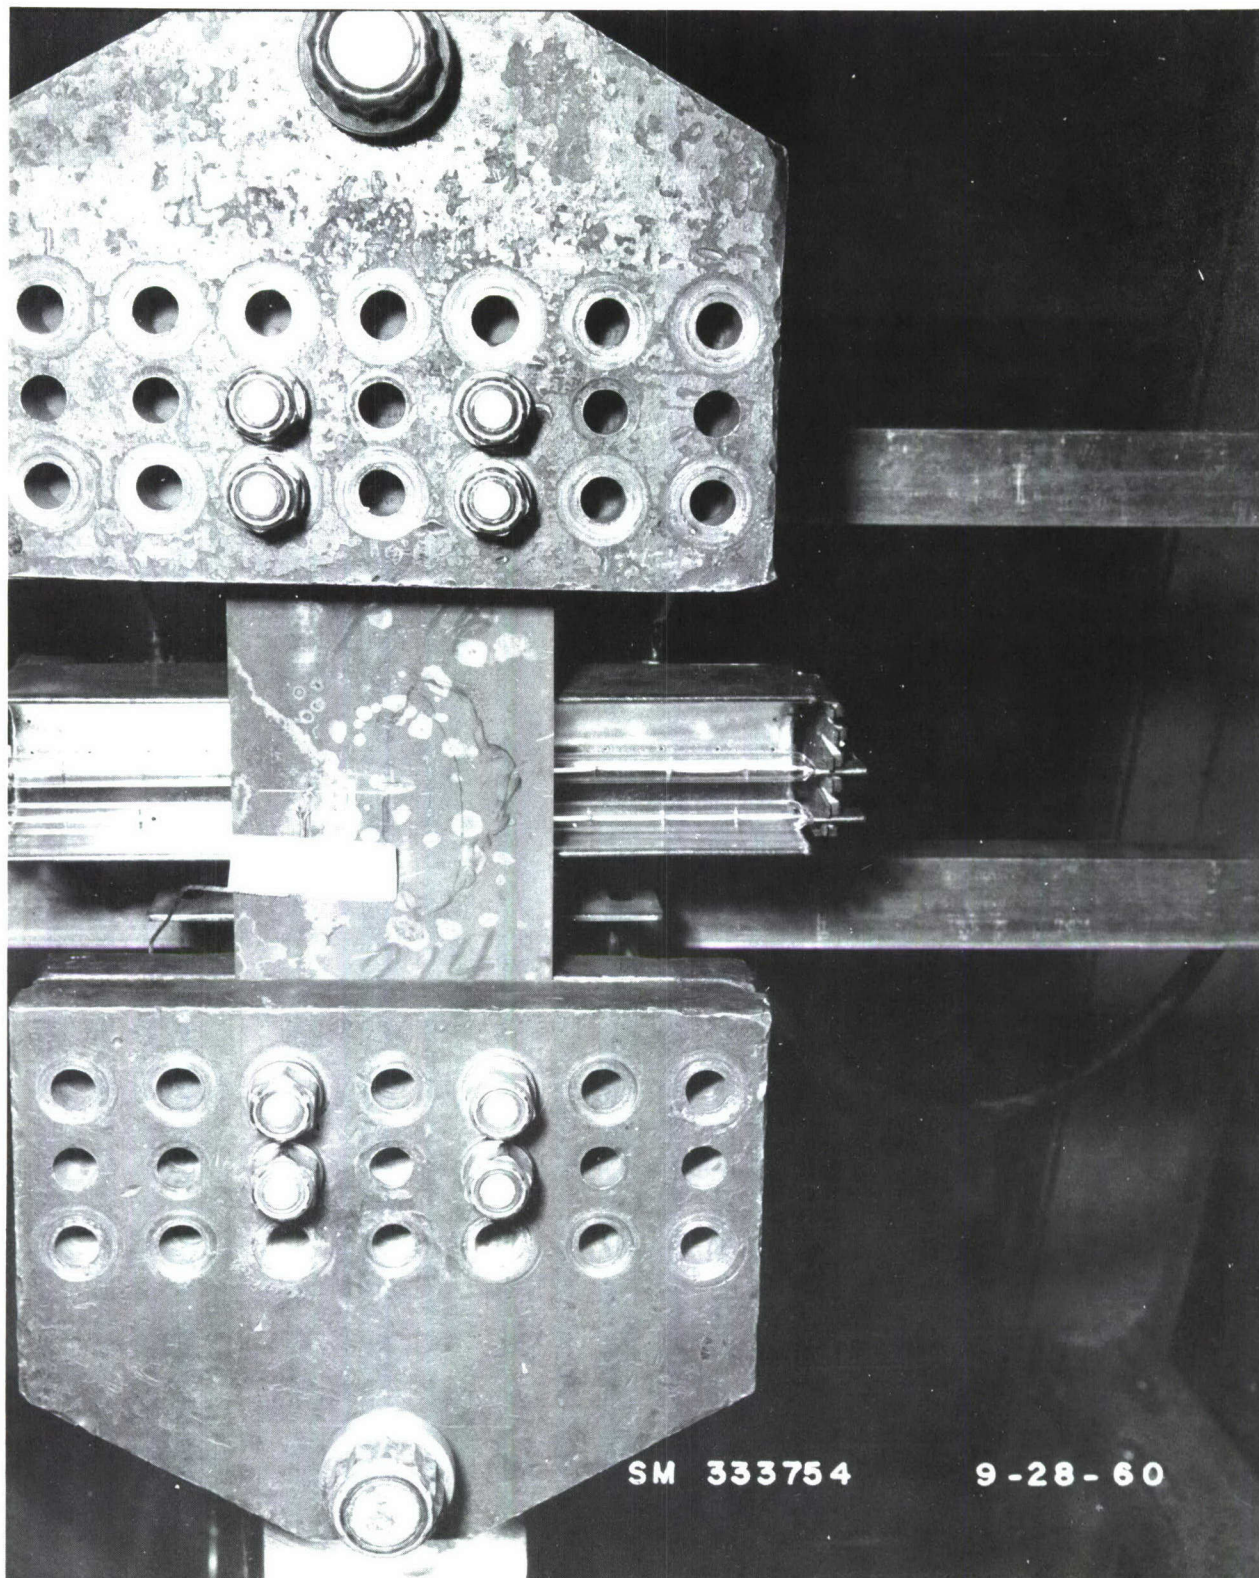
TEST SET-UP IN LOW-CYCLE HYDRAULIC FATIGUE TEST MACHINE
